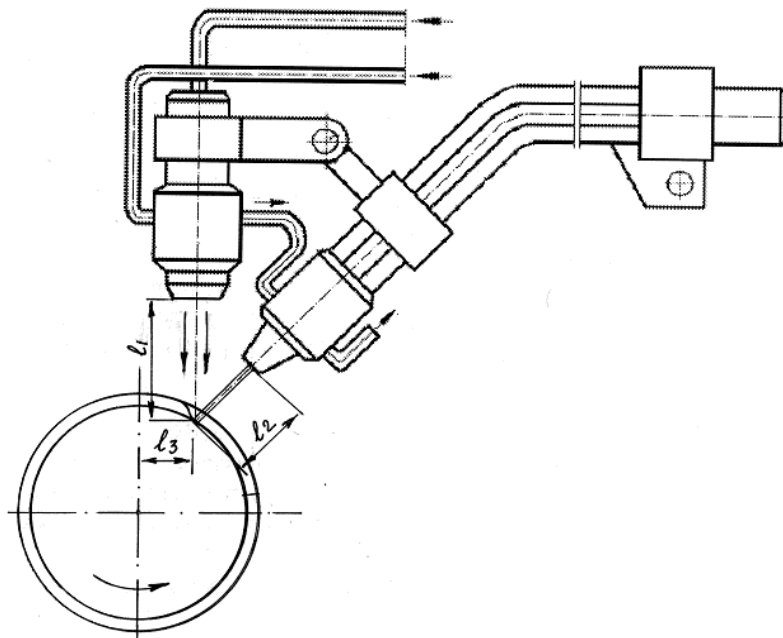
Circuit welding parts in flame protection: 1 - nozzle for air; 2 - hinge attaching the nozzle to the mouthpiece; 3 - mouthpiece for wire feed; 4 - detail, surfaced.
